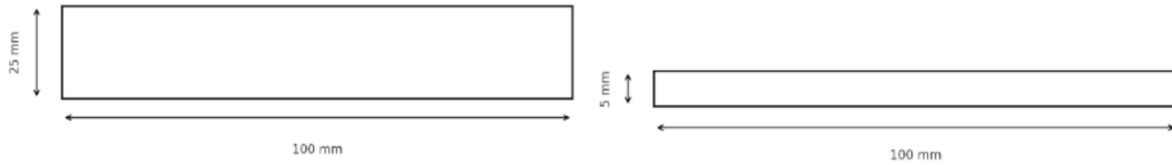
Geometry and dimensions of the tensile test specimen used in this study (100 mm × 25 mm × 5 mm).
